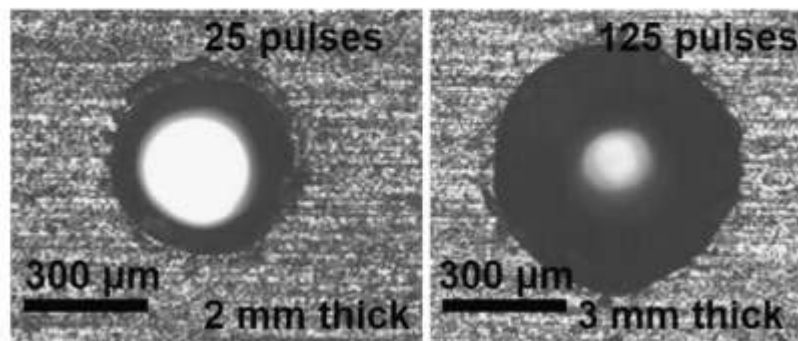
Machining in 2 and 3 mm thick SiC plates. (After Samant et al.<sup>66</sup>).
